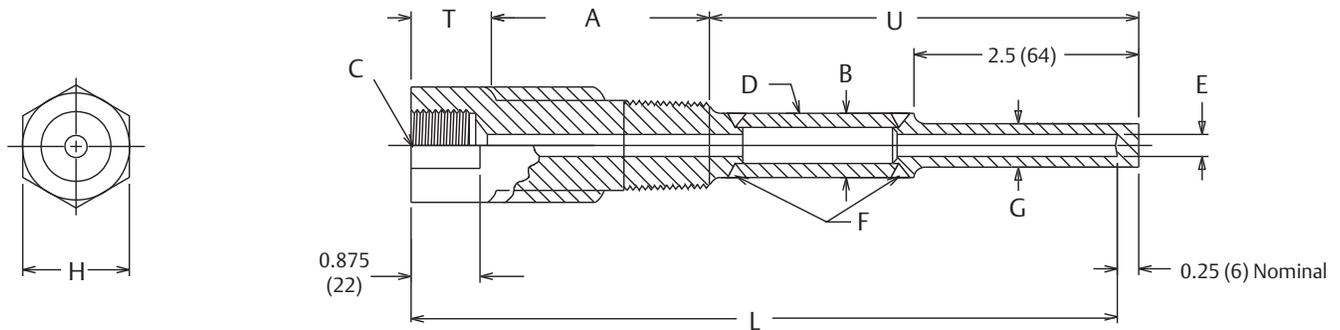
Thread Mounted Thermowells - Stepped⁽¹⁾
